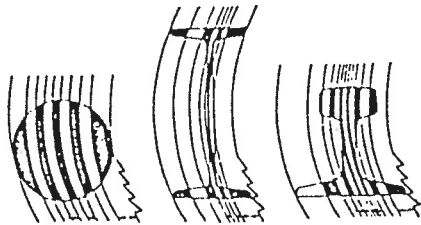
Feed adjustment during a saw cut to suit the material section in front of the saw blade.
